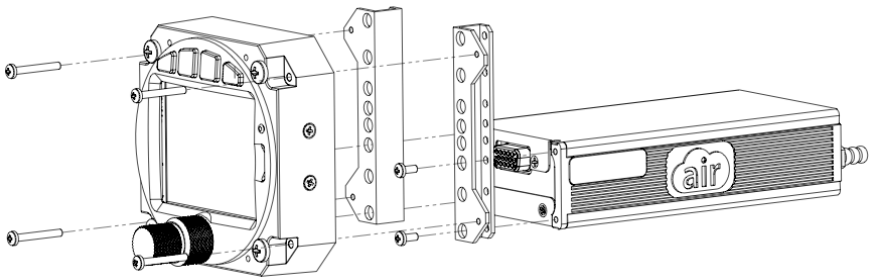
Exploded drawing of ATD-57, AT-1, and all small parts of the optional mounting kit.
